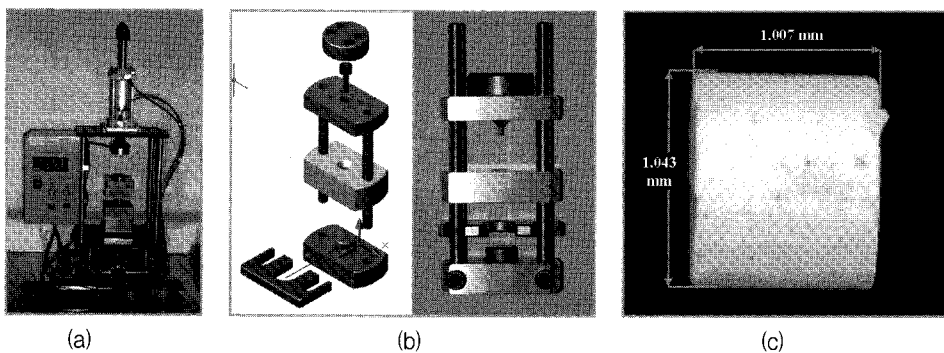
Photograph of pellet compacting equipment for Yb_2O_3 powder; (a) pressing equipment, (b) compacting jig, (c) fabricated Yb_2O_3 pellet
